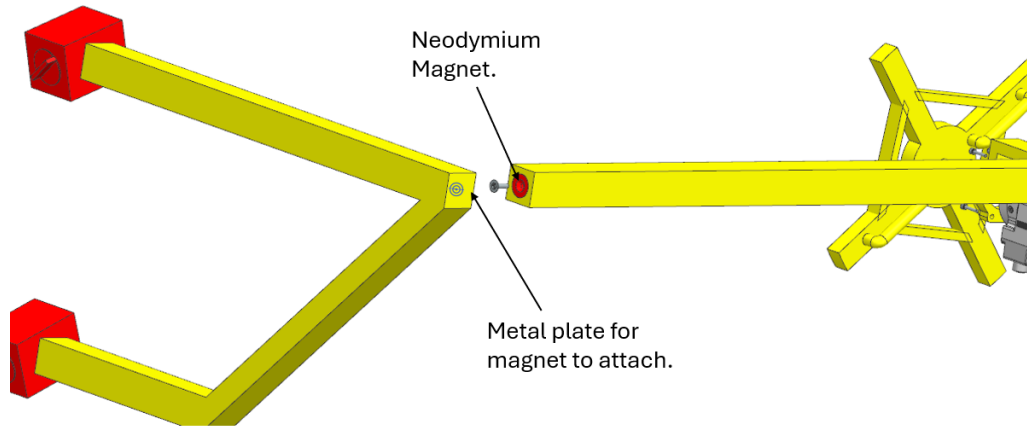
Connection explanation of parts one and two for crankshaft measuring tool.
